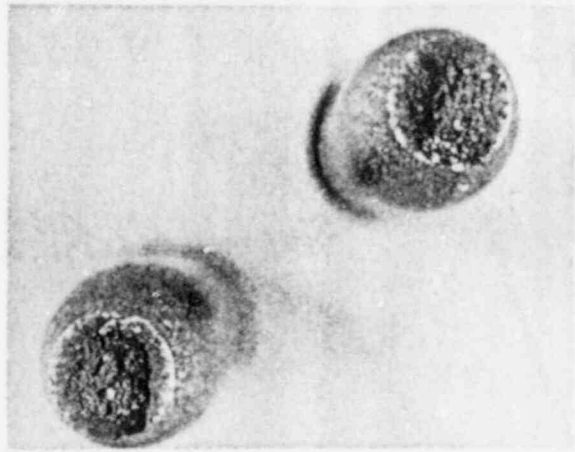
Fracture Location, Necking Behavior, and Fracture Appearance for Irradiated Weld Metal Tensile Specimens
